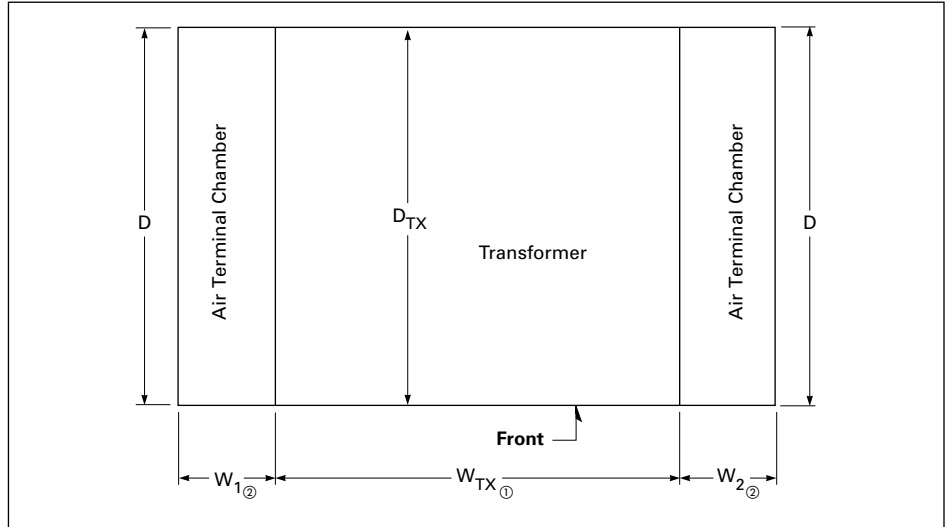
Dry-Type Indoor Using Air Terminal Chambers—Top View
